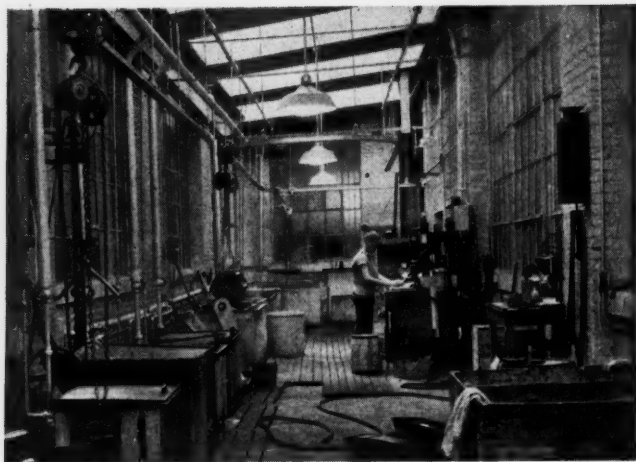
View of plating department. Parts subject to rust are cadmium plated and other parts chrome plated appearance.
